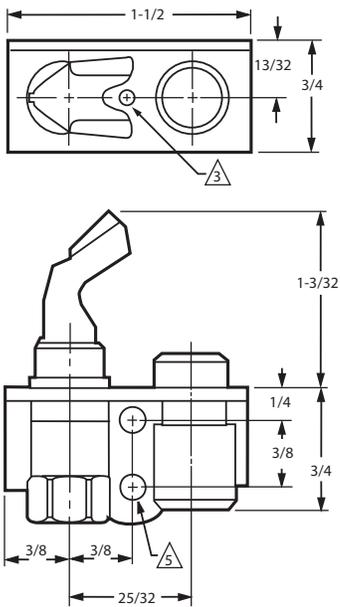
Q314 A,B,E and K mounting brackets and dimensions
